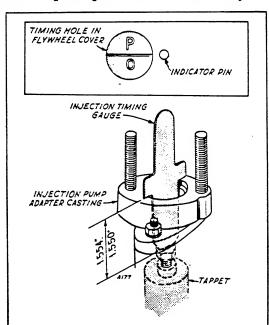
TIMING THE INJECTION PUMP TO THE ENGINE
